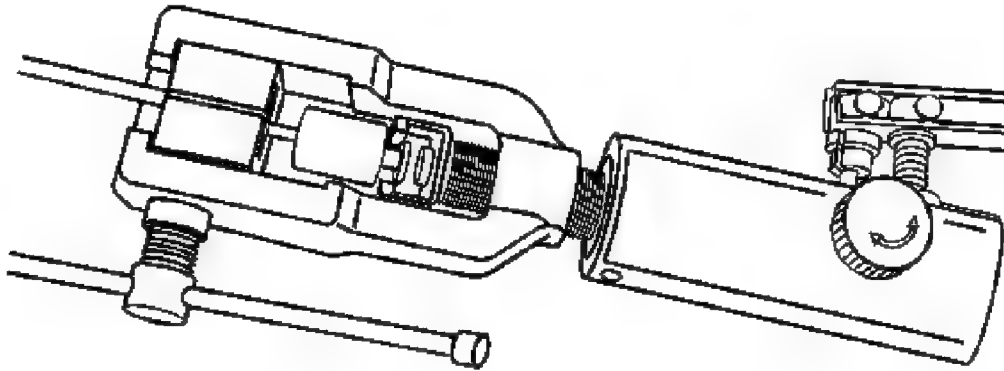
Rotating J 45405 To Bottom Against Die Cage
